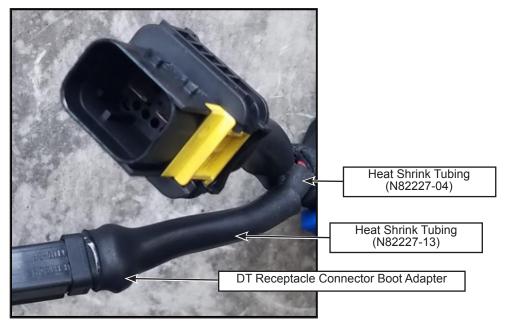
Heat Shrink Tubing Installation on DT Receptacle Connector Wiring at Harness Side
